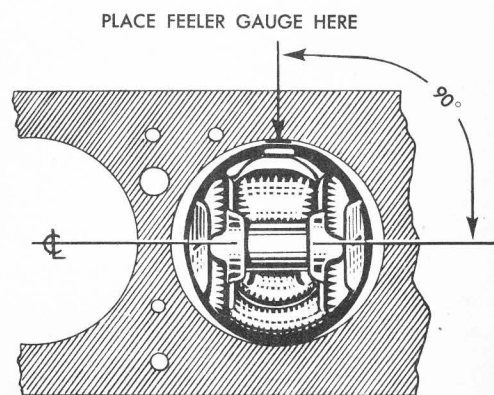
Position of Feeler Gauge for Checking Fit of Piston
